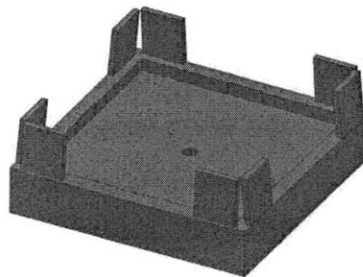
CAD model of preload mechanism. The 5° angle on the attachment posts preloads the locking plate against the tendons.
